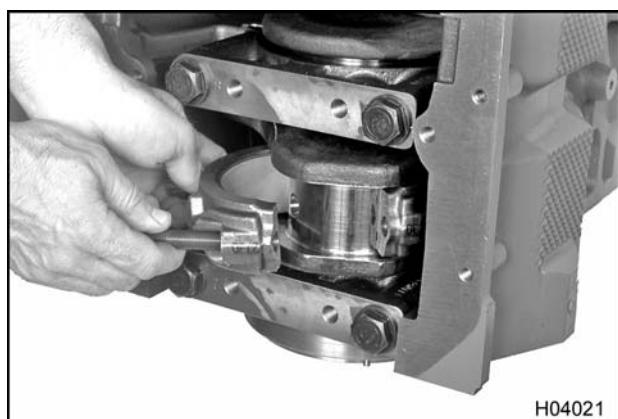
Connecting rod cap with M11 connecting rod cap bolts (protrusion points to front of engine)
